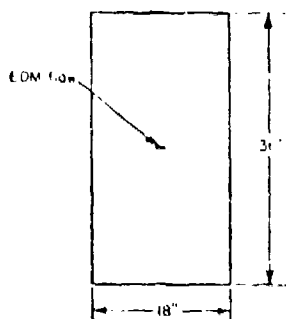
SHEET FRACTURE TOUGHNESS SPECIMEN
